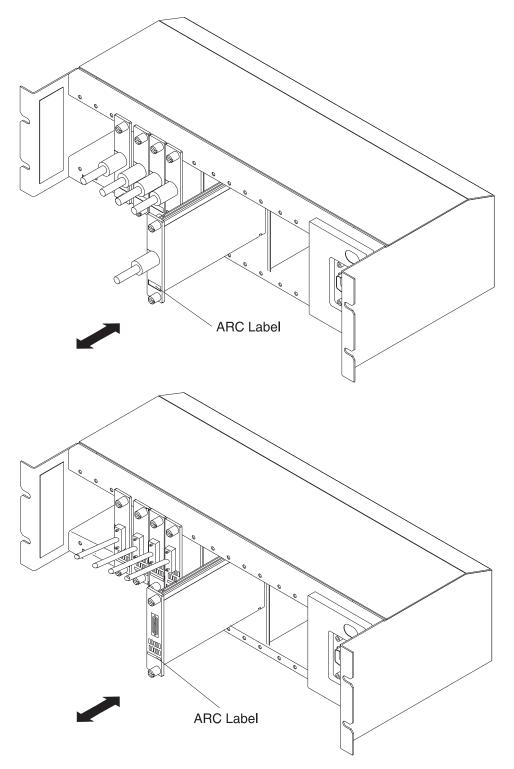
ARC Assembly A (top) and ARC Assembly B (bottom) in an LCB
